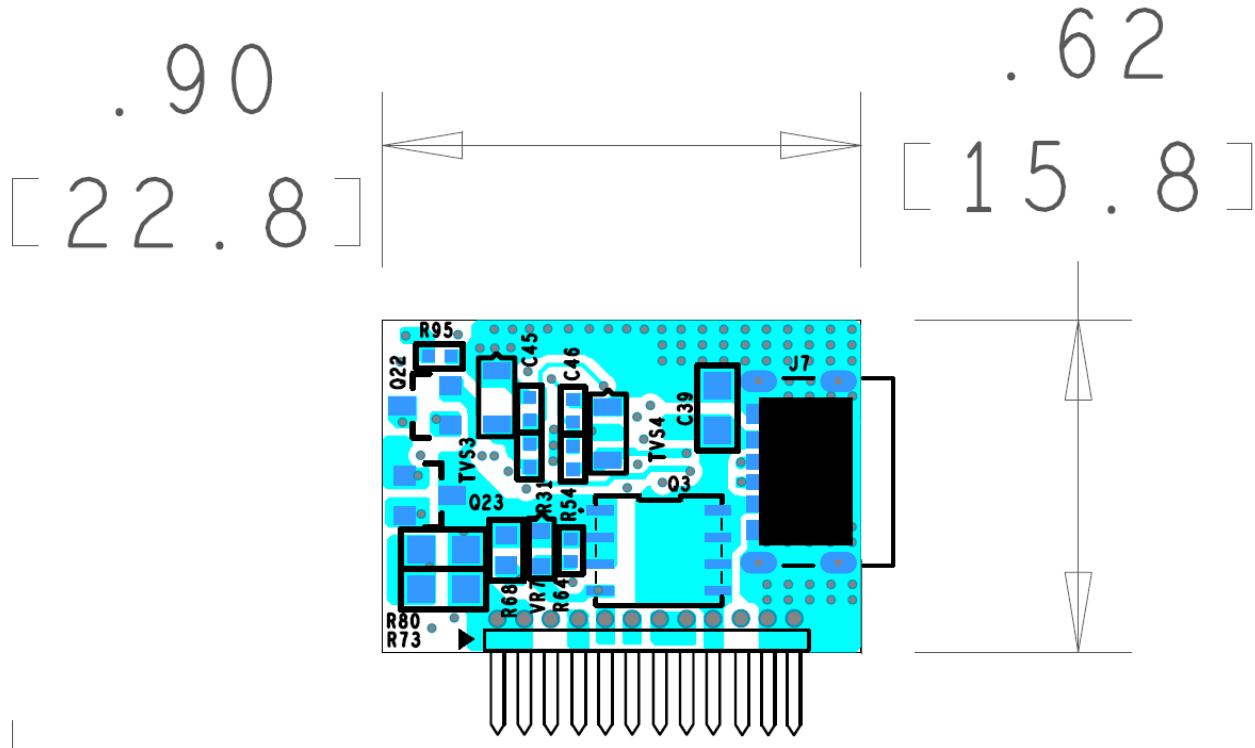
Daughter Board Printed Circuit Layout, Top.
